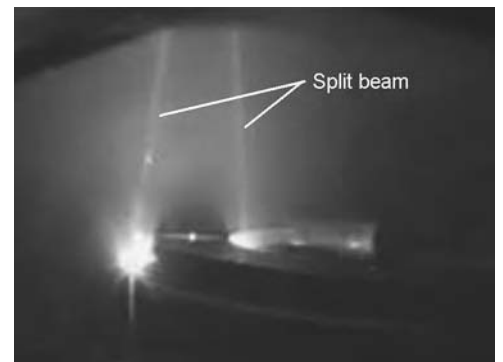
Two-pool welding with one electron beam. Courtesy of PTR-Precision Technologies, Inc.
